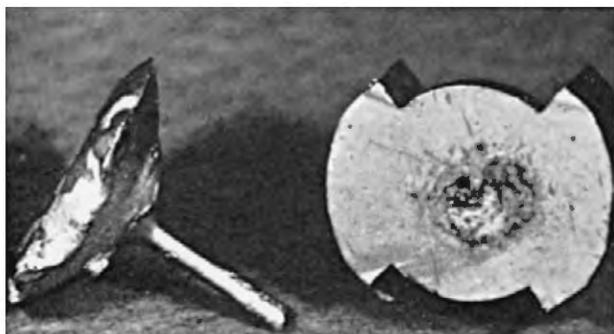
Localized shrinkage caused by using a sprue of improper diameter.
